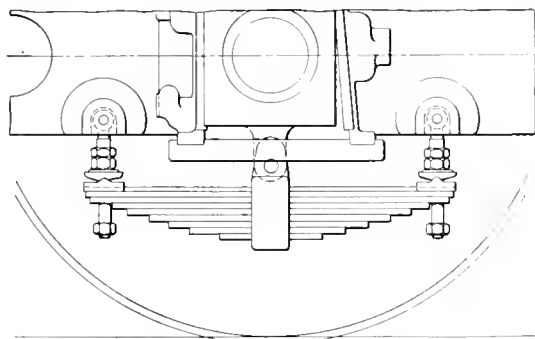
Adjustable Spring Link Used On Main Line Locomotives
